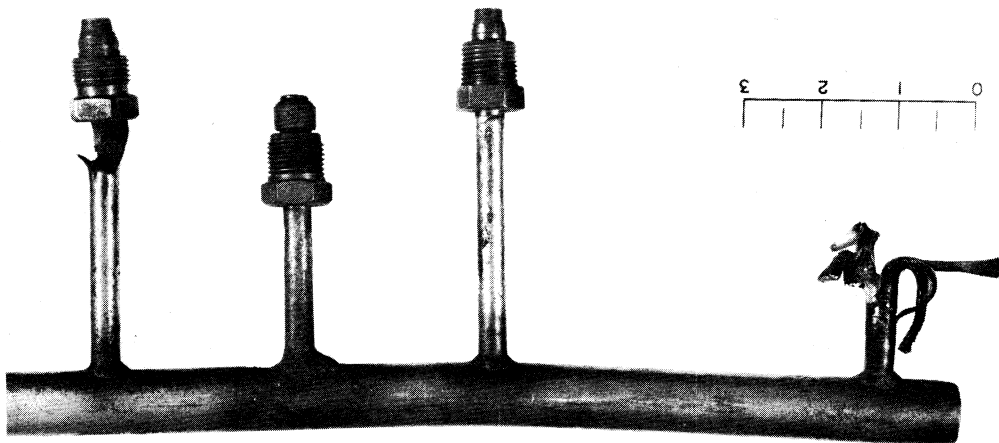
View of Control Valve Manifold Line Following Explosion.
